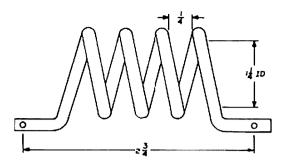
Construction of the plate-tank coil for the 6-meter SB200. Material is 3/16" copper tubing. Two small holes at ends are drilled for 6-32 screws.
